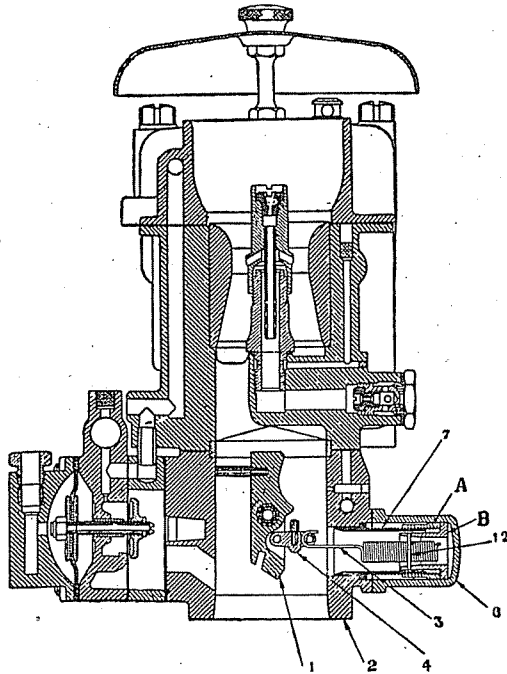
Downdraught Solex Governor Carburettor in Section.
